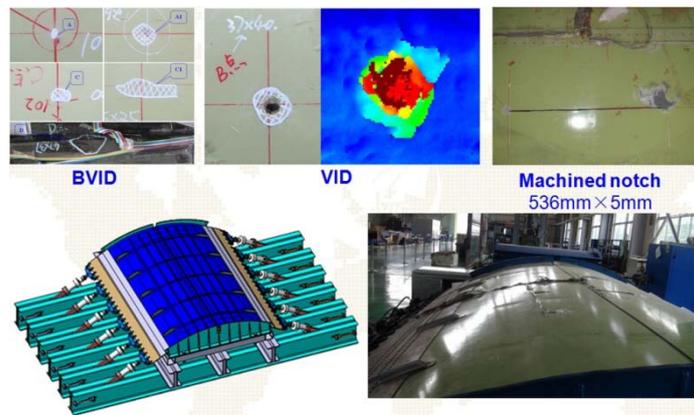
Damage tolerance and fatigue test of composite panel under interior pressure.
